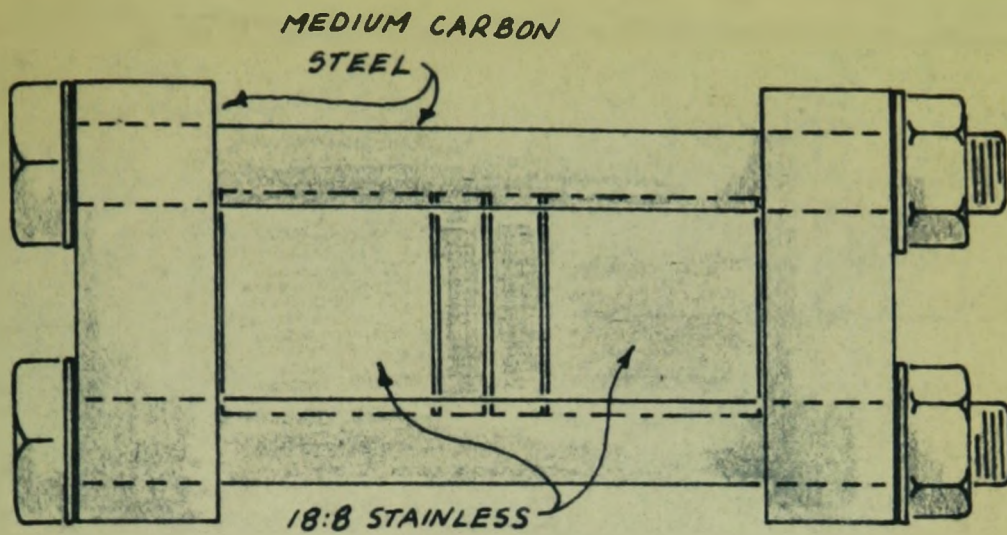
Composite mild steel - stainless steel diffusion couple holder, actual size.
